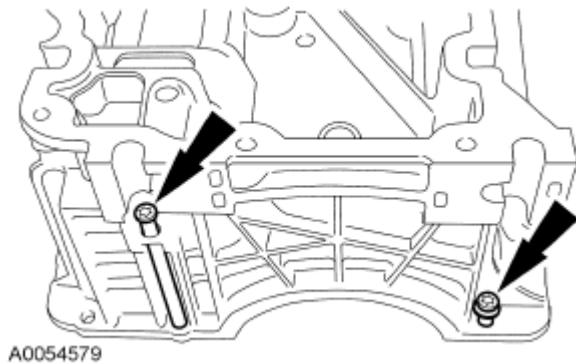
Locating Cylinder Block Cradle Rear Bolts
